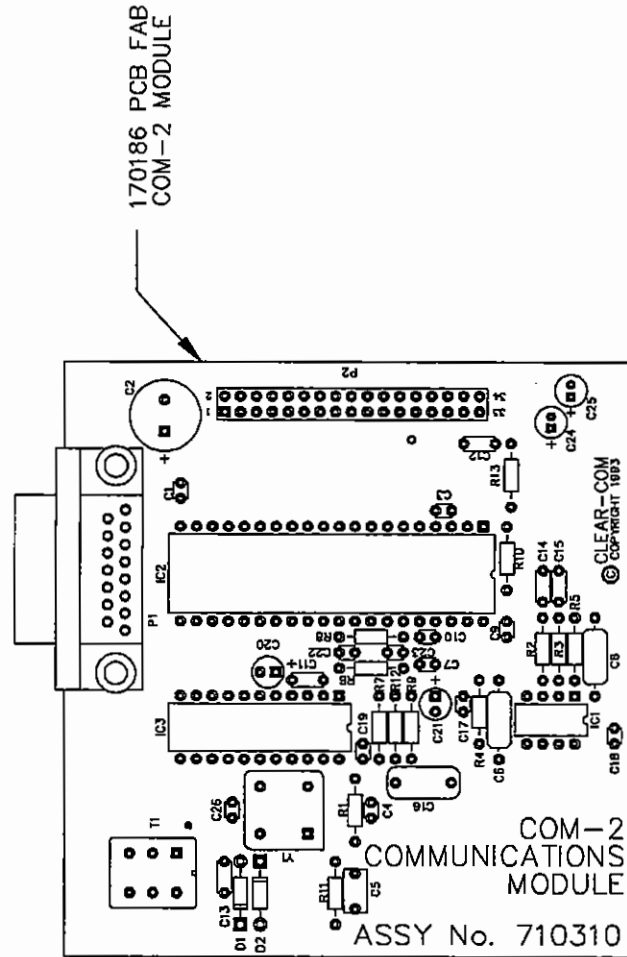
Assembly Drawing - COM-2 Communications Module
